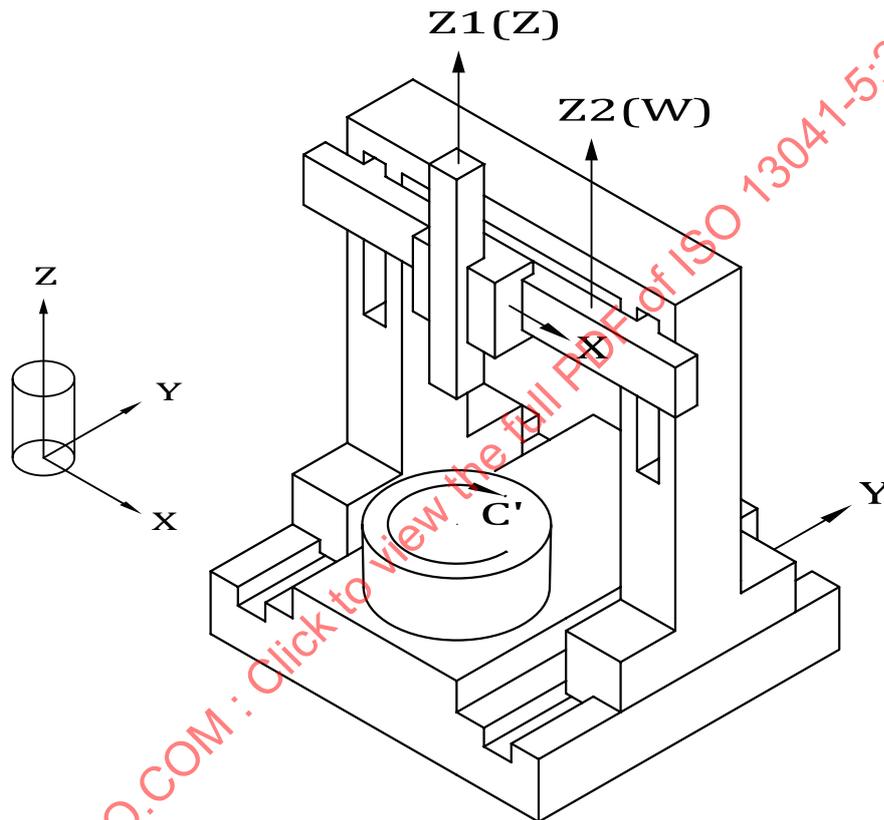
Typical example of a turning machine with a vertical workholding spindle
